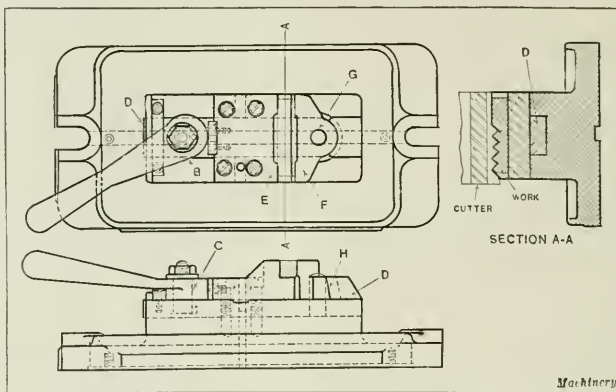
Milling Fixture which will accommodate a Variety of Work
